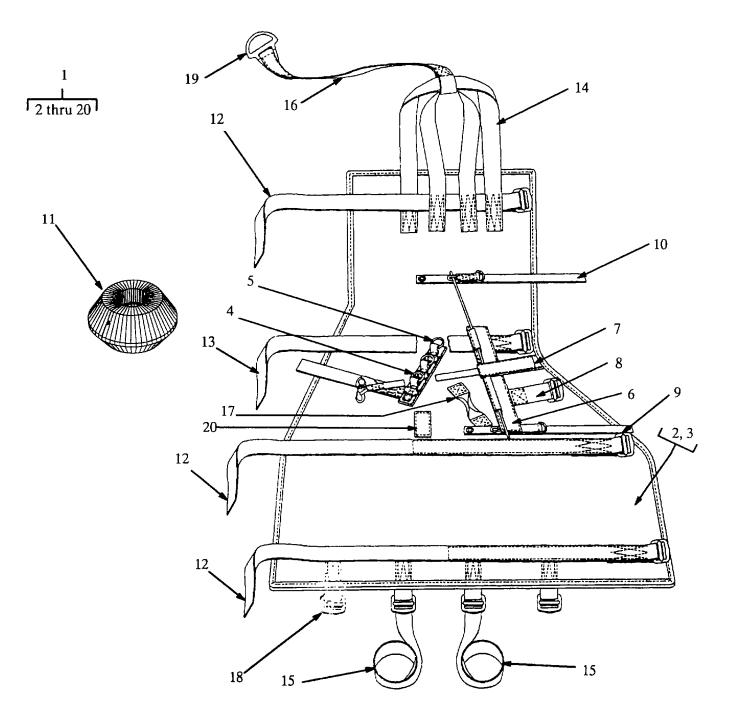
JUMP PACK, STINGER MISSILE (C-31 blank)/C-32
